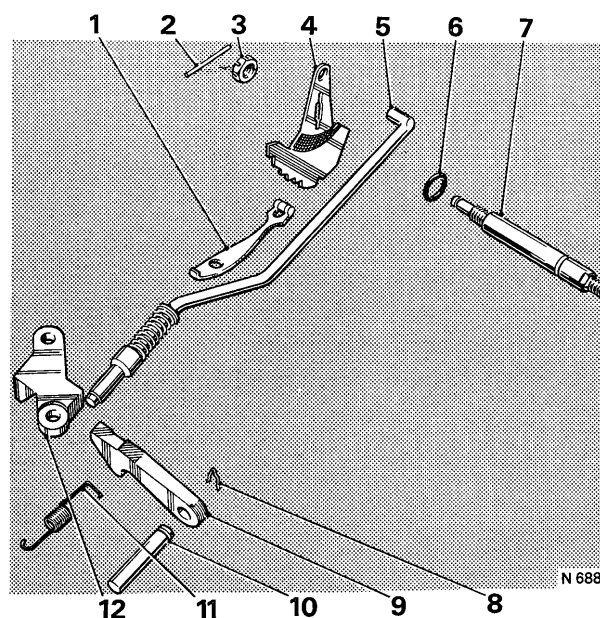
MANUAL AND PARKING LINKAGE—EXPLODED
